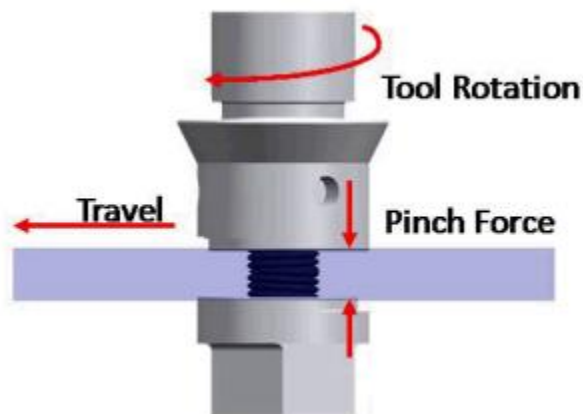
Three Welding Parameters as seen on a Self-Reacting Pin Tool [10]
